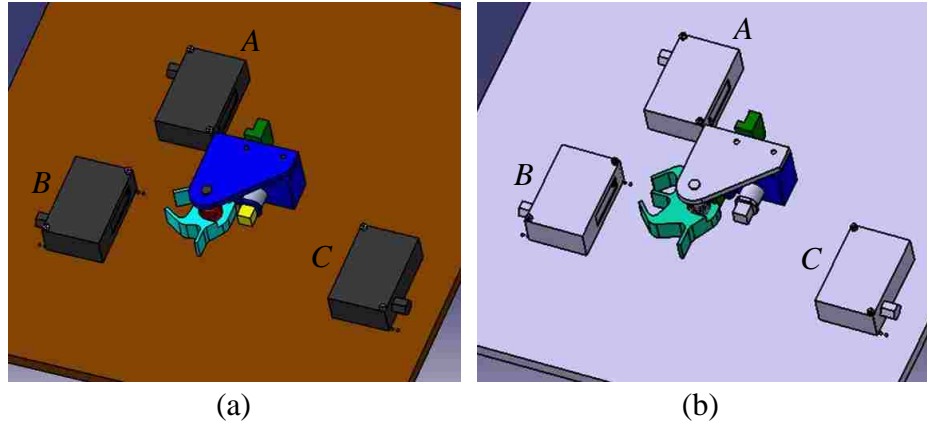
CAD model of the cutter deployment apparatus. (a) 3-bladed cutter assembly. (b) 4-bladed cutter assembly. Parts shown in grey are reused.
